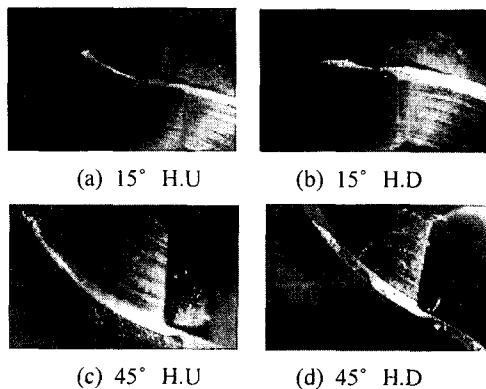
Flank wear form according to tool path at cutting speed in 100m/min
